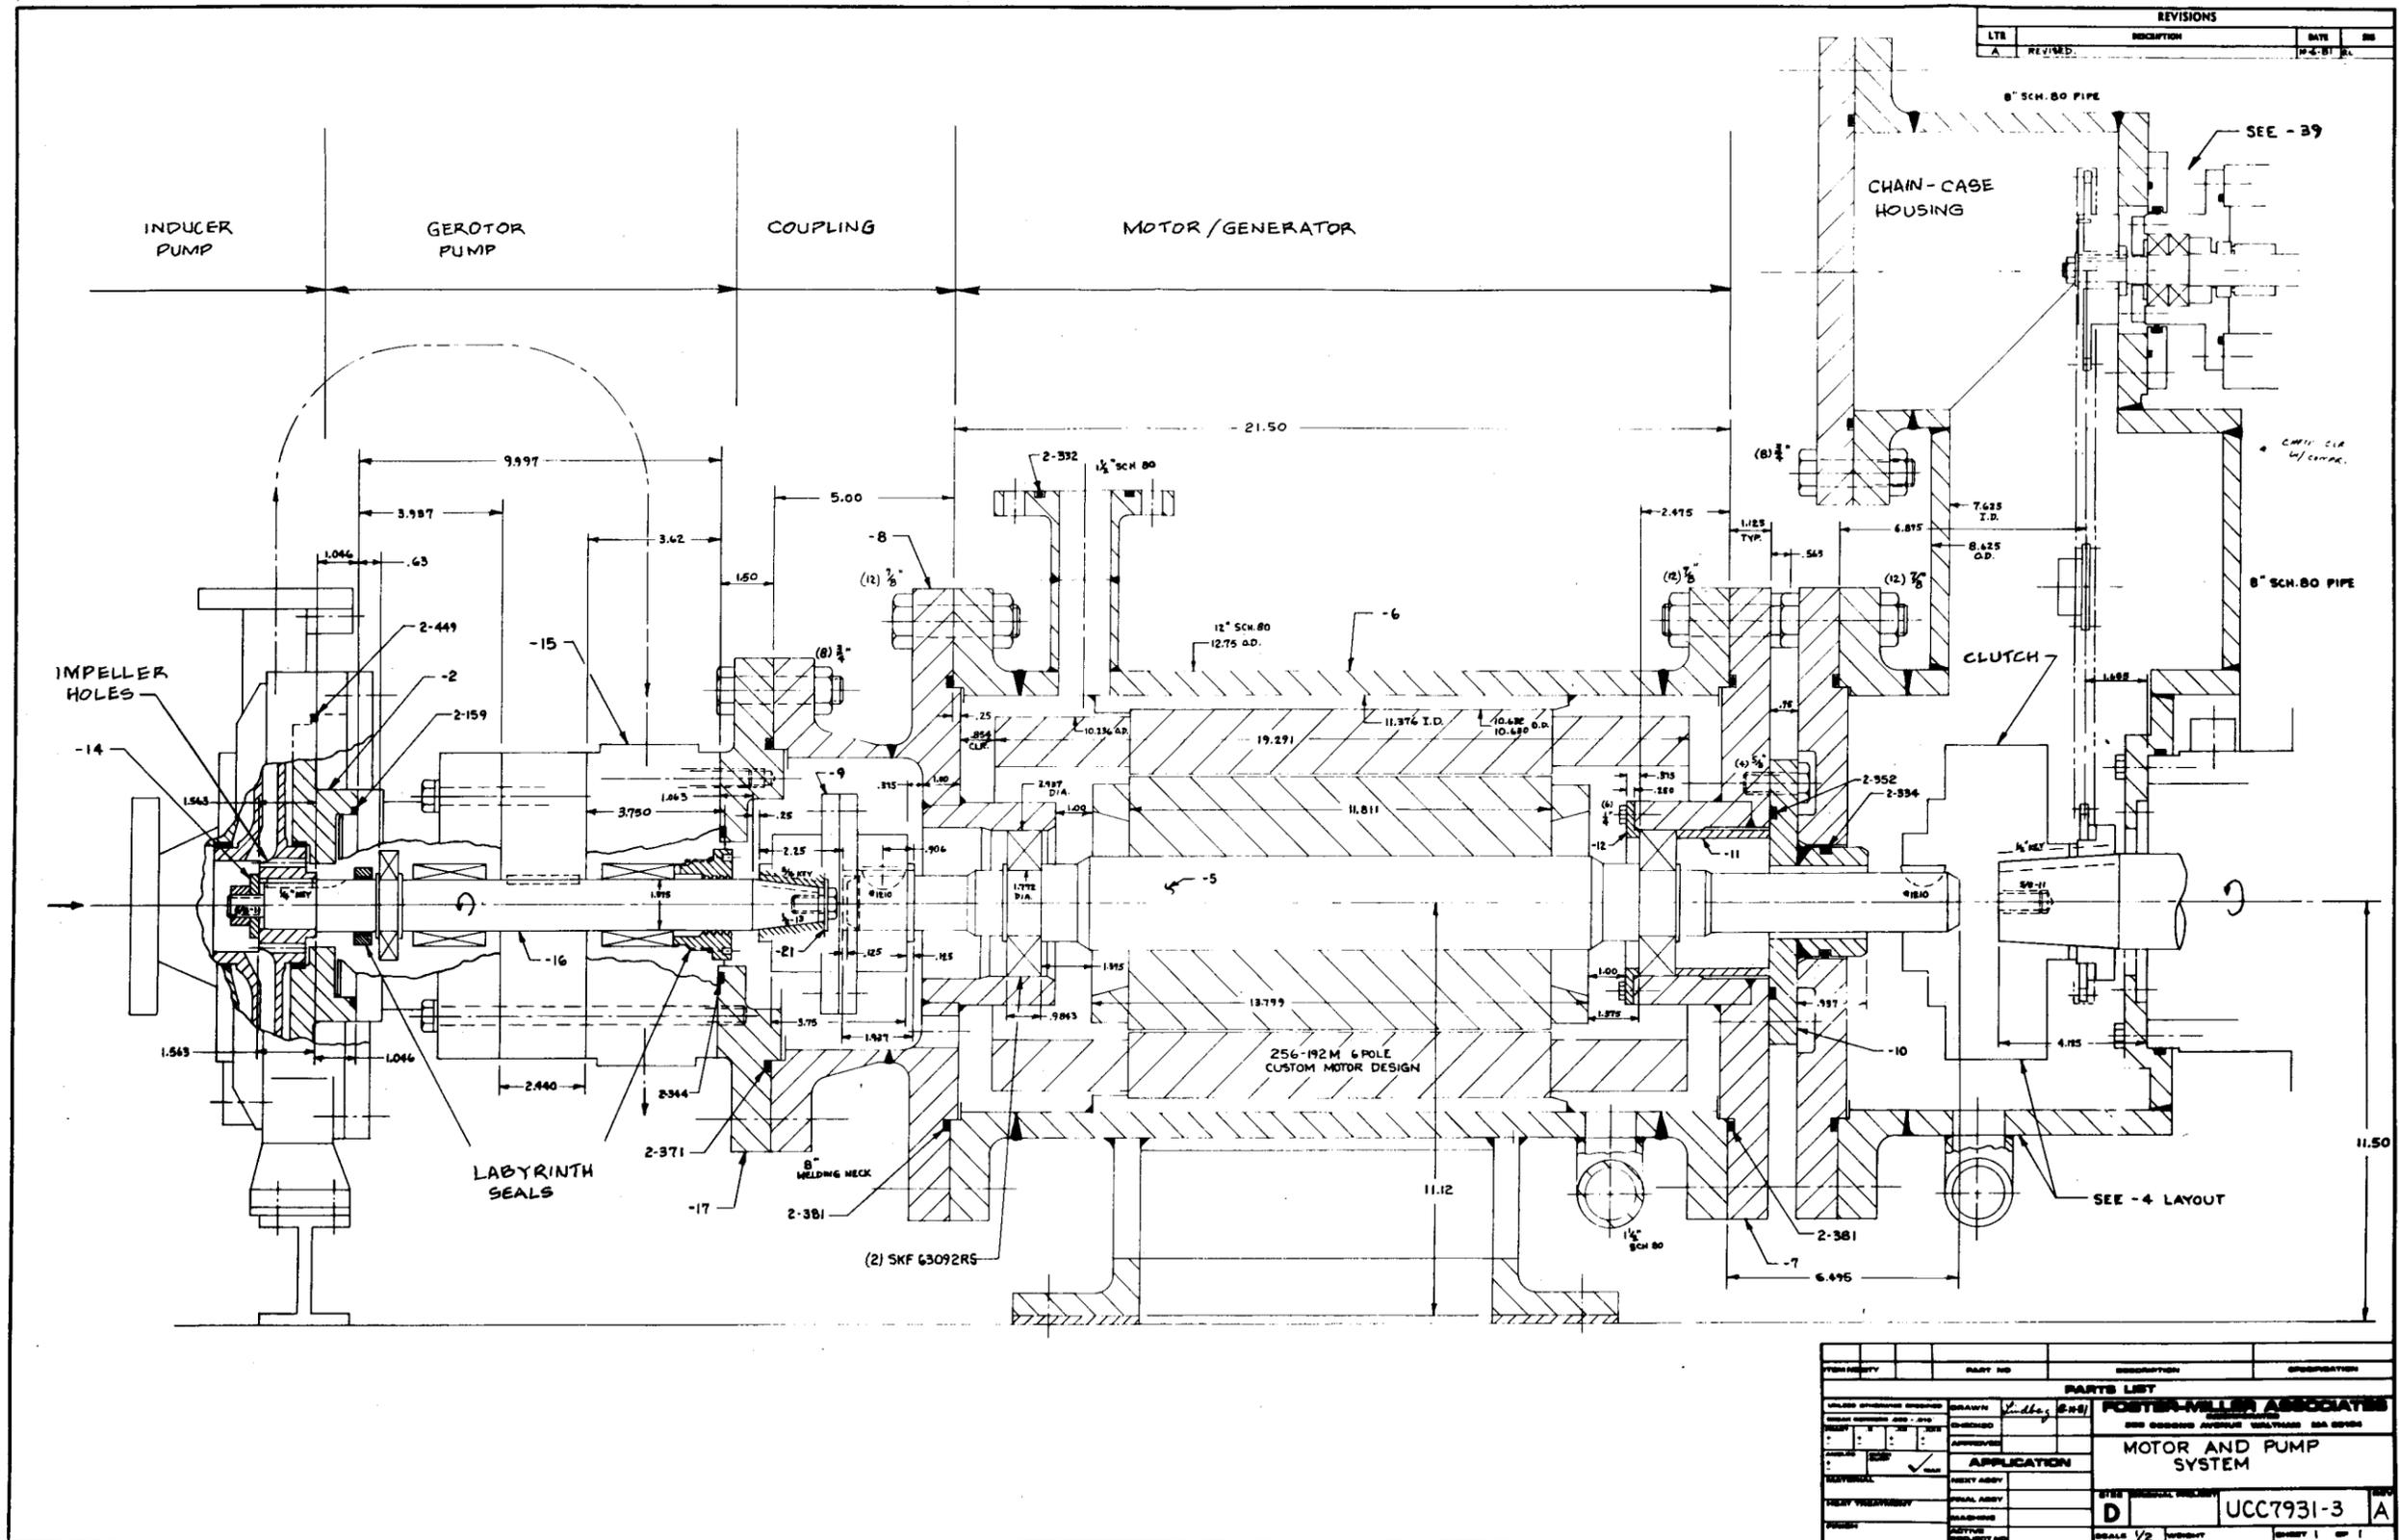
Feed Pump, Motor/Generator and Chain Case Housing Before Modification
